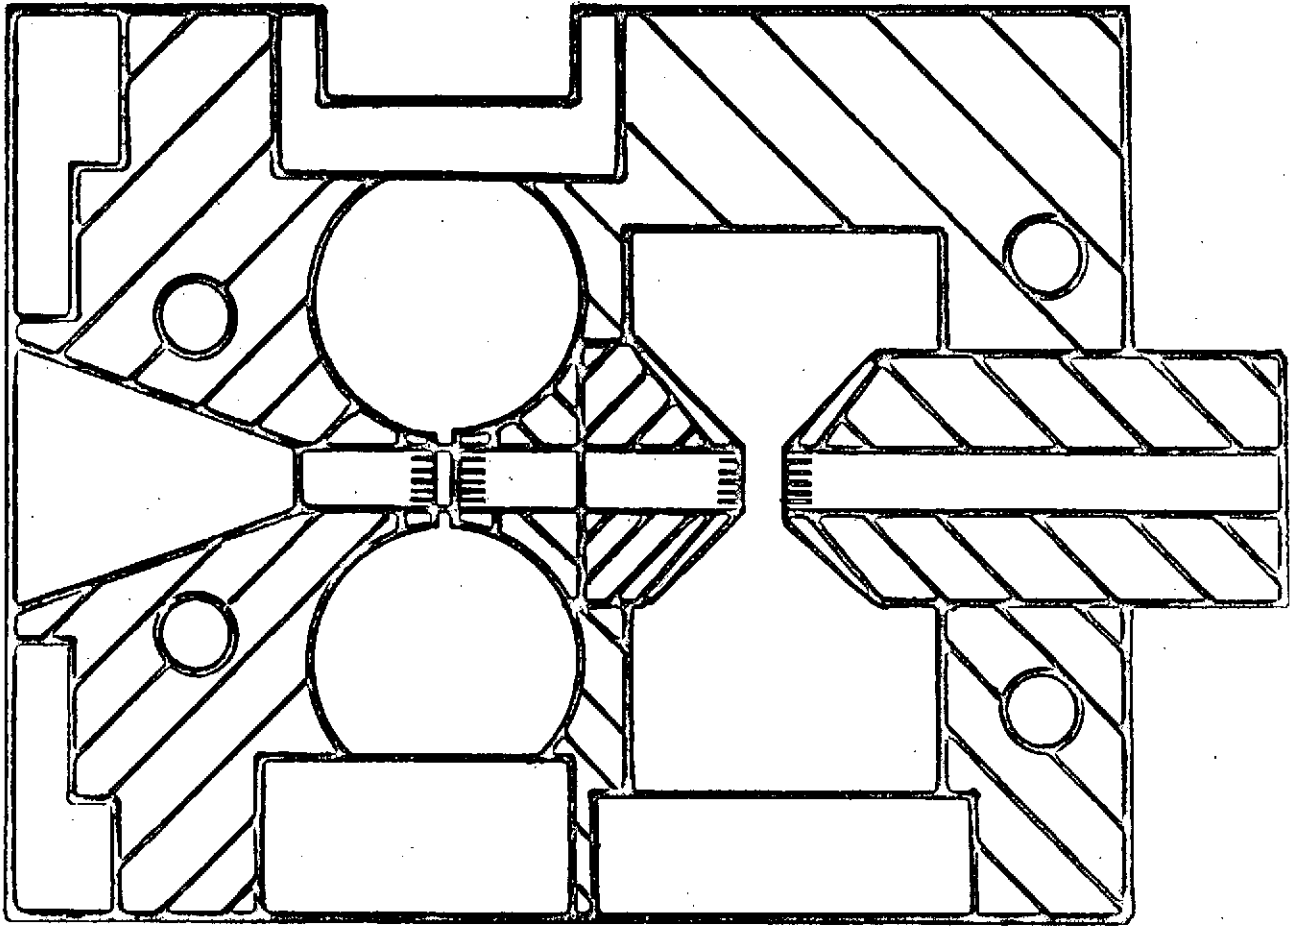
Outline Drawing of Tube Mounted in Focusing Solenoid
